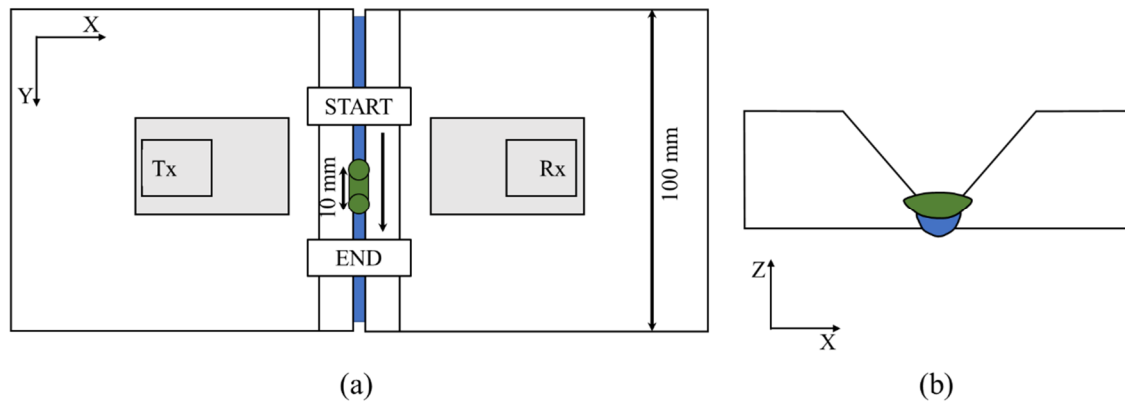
Schematic view of experiment 4 showing position of weld in relation to probes in both a (a) plan and (b) section view. [144]
